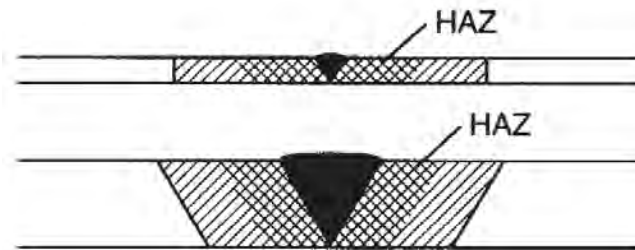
HAZ softening at aluminium welds (Dwight, 1999)
